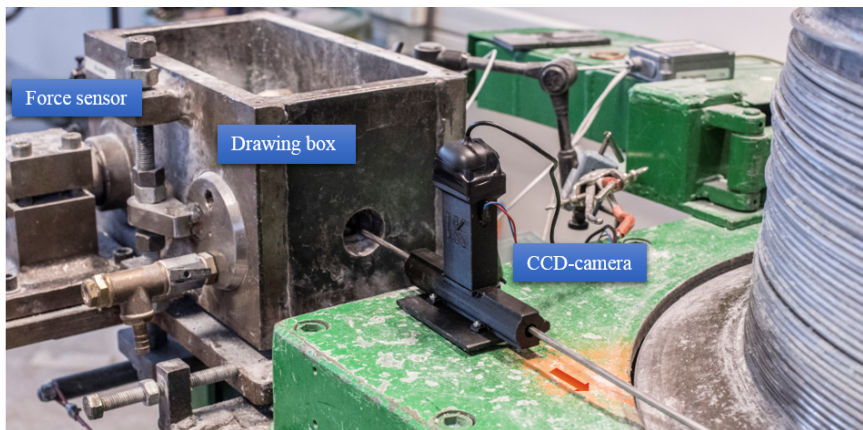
Experimental setup, brightness measuring equipment is placed after the wire exits the drawing die. (Figure from Paper IV)
